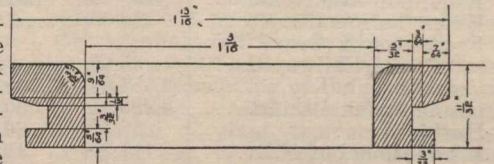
C.P.R. Standard Air Brake Hose Gasket.
